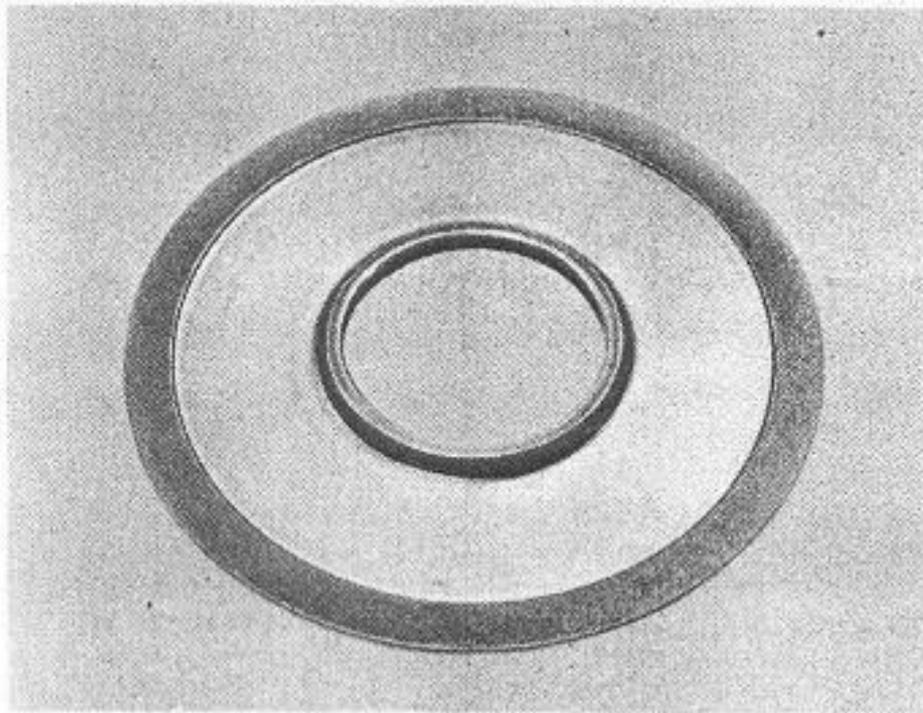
Disc turned on ECM lathe to an accuracy of .0003 in. (*Courtesy, Anocut Engineering Company*)
